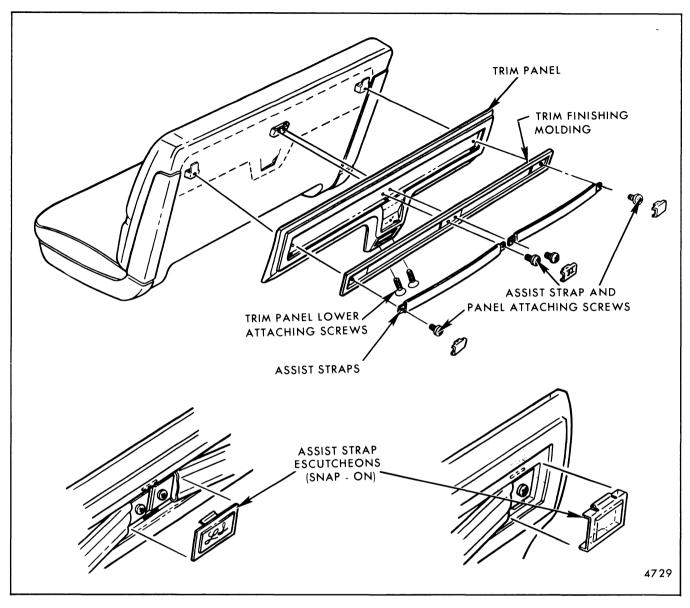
Front Seat Back Assist Straps and Panel Assembly - Oldsmobile Luxury Sedan
